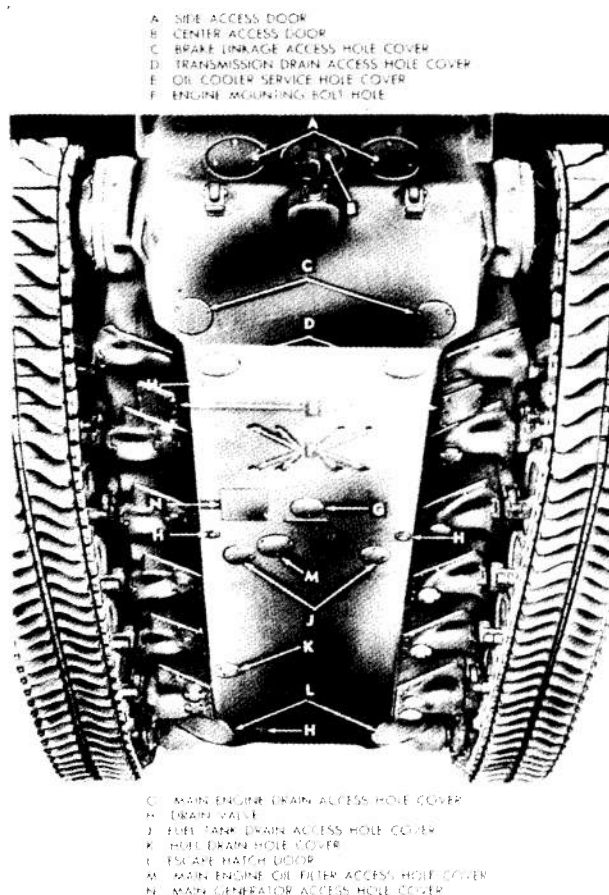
Bottom View of Armored Hull Showing Various Access Plates, Covers, and Doors
